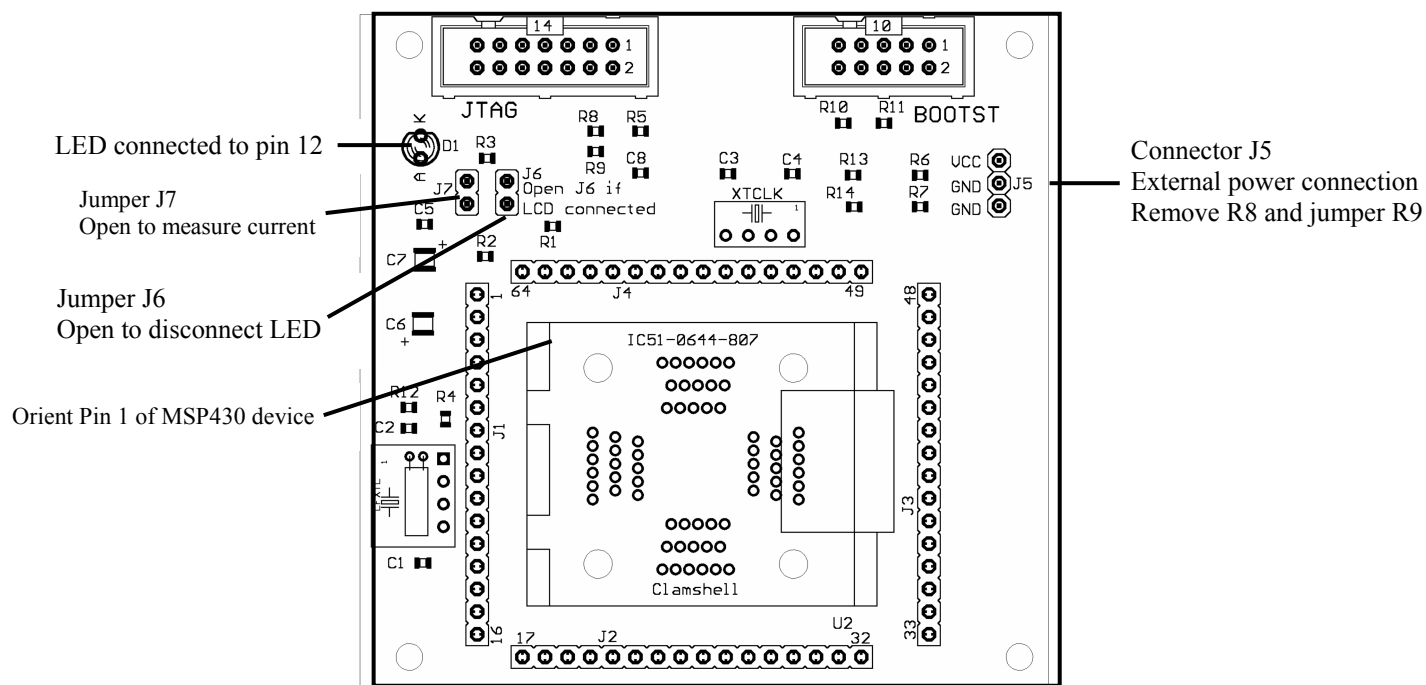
MSP-TS430PM64 Target Socket module, PCB Pictorials
